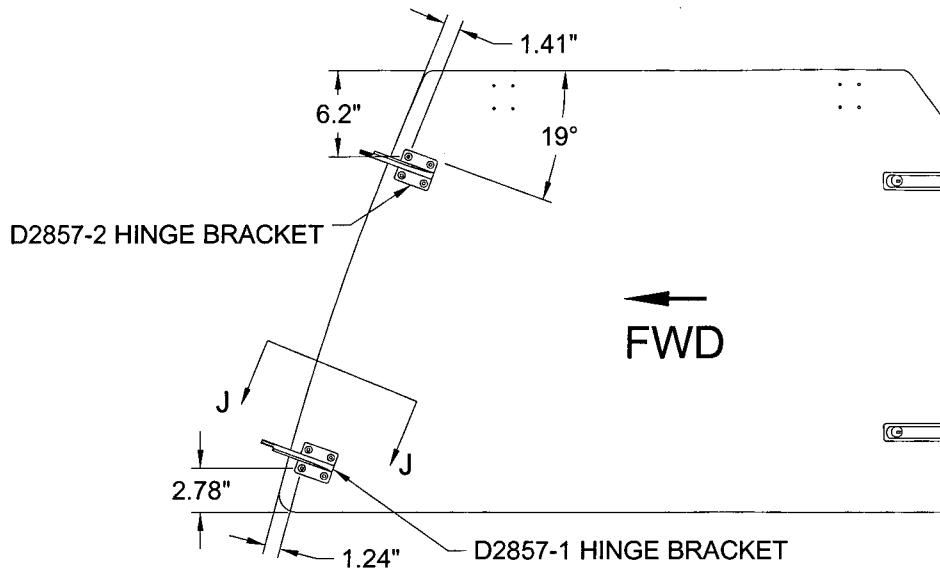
(a). HINGE BRACKET POSITION ON LH D3186-1 SPACEPOD DOOR
